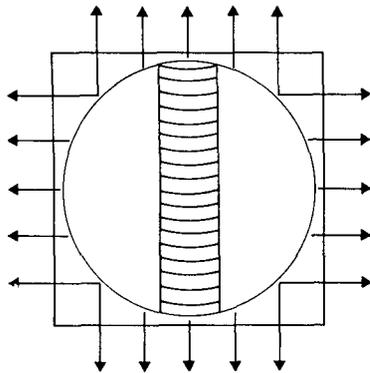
Relative crack stoppage in a 1-inch ship plate at 70°F by full- and partial-penetration VV butt weld of E12016 (grade 260) deposit
